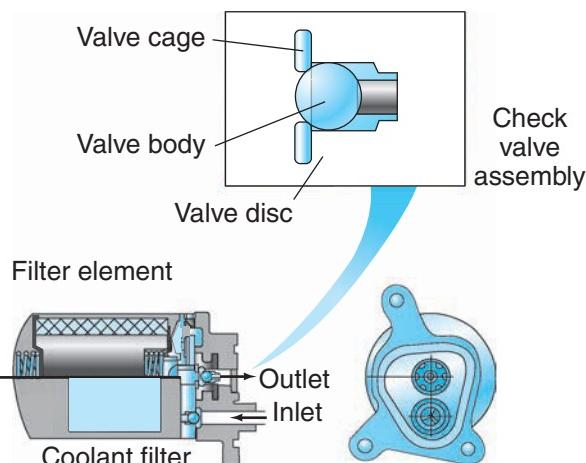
Coolant filter with a mounting pad check valve. (Courtesy of Navistar)
